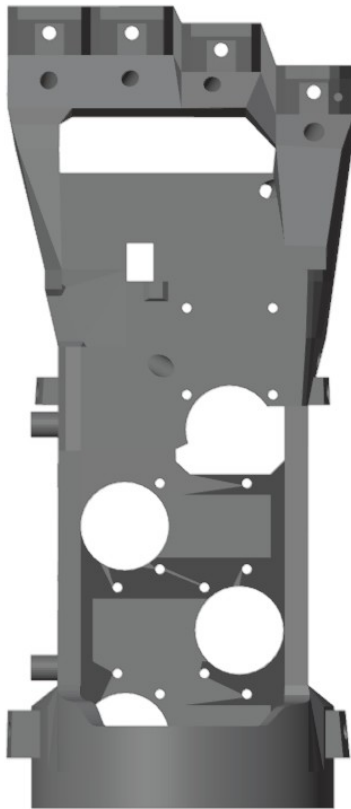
Left Hand - Skeleton - Front View – no components mounted
